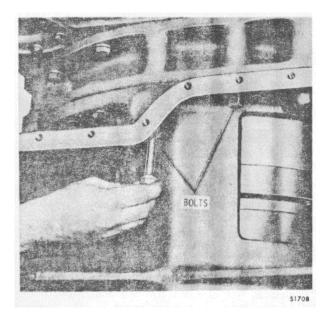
Installing Converter Housing Bolts at Bottom of Transmission
